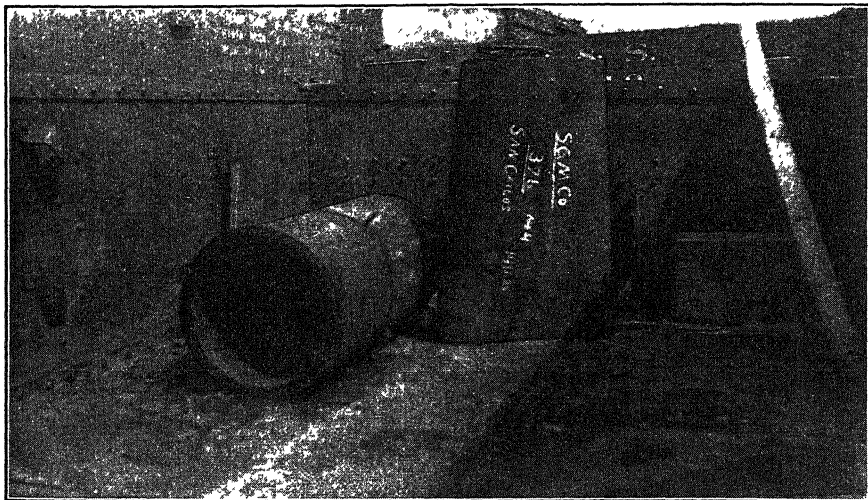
A 24-in. \times 40-ft. steel smoke-stack knocked down and nested for shipment. One bundle 30 in. \times 30 in. \times 57 in., 1,107 lb.; and one brichin 36 in. \times 36 in., 141 lb.
